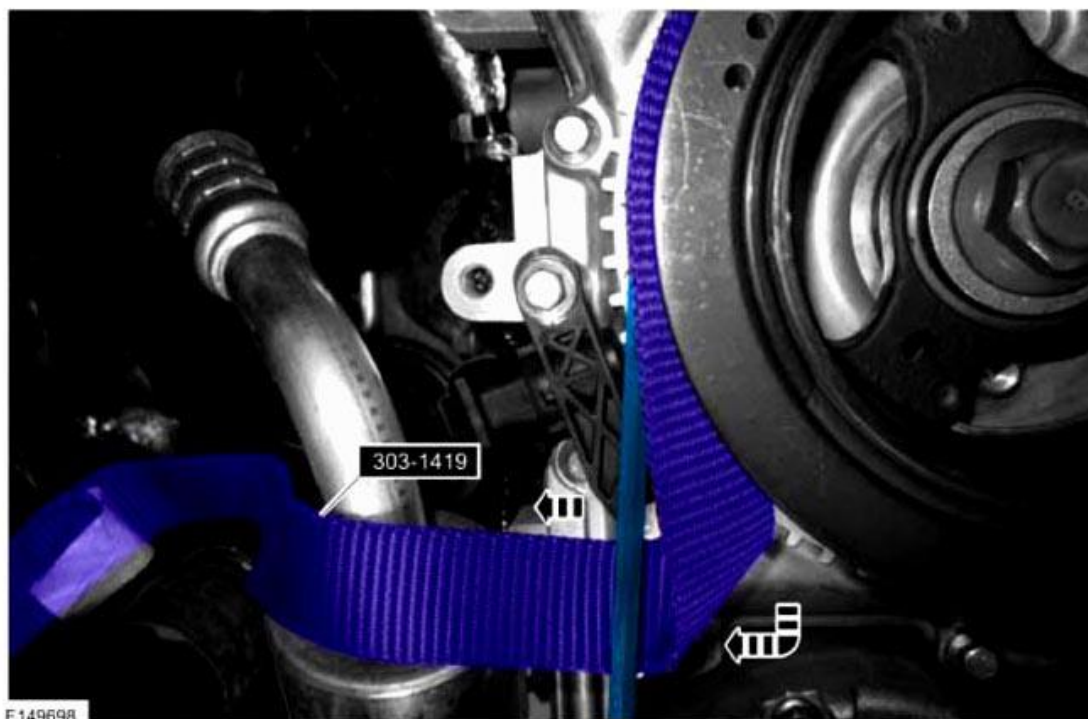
Folding Special Tool Around Inside Of A/C Compressor Belt
